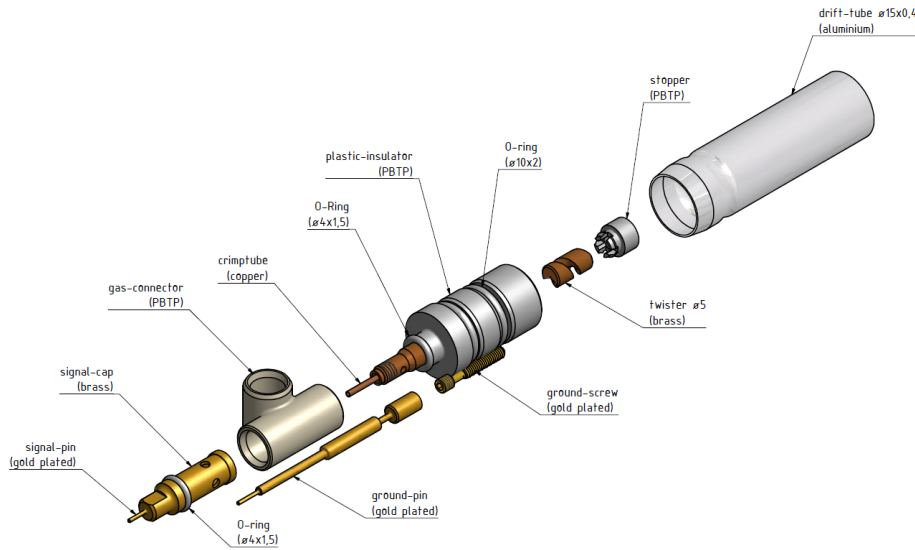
Exploded view of the tube endplug. Included in the lower left is the gas connection as well as signal readout as well as the grounding pin and screw for the tube.
